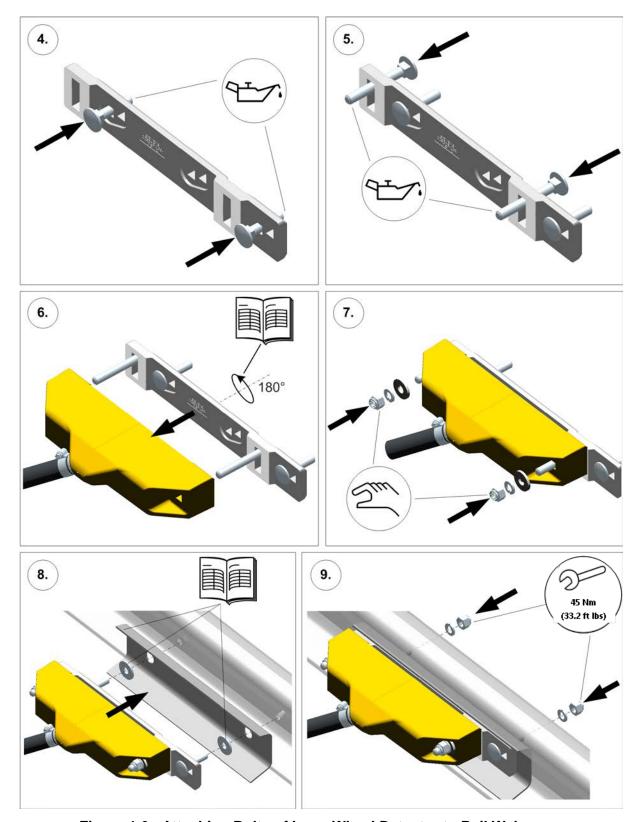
Attaching Bolts of Inner Wheel Detector to Rail Web
